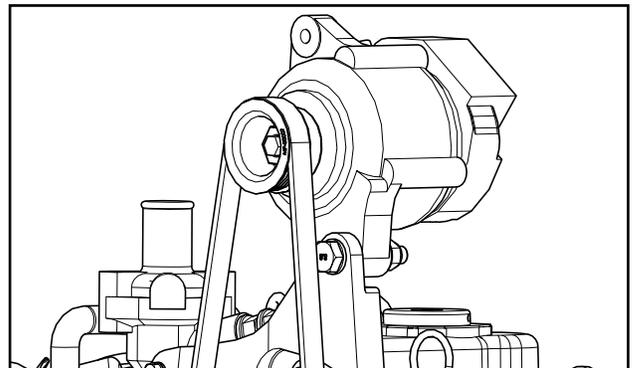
(Auxiliary Lower Nut & Bolt)
